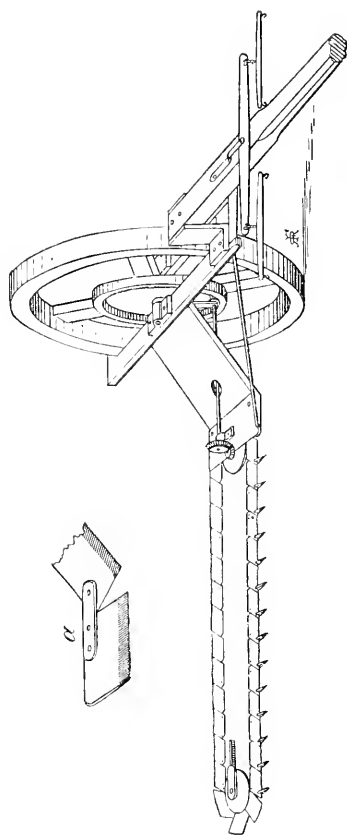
Perspective View of the Ketchum Machine. *a*, Section of Cutter Knives.
